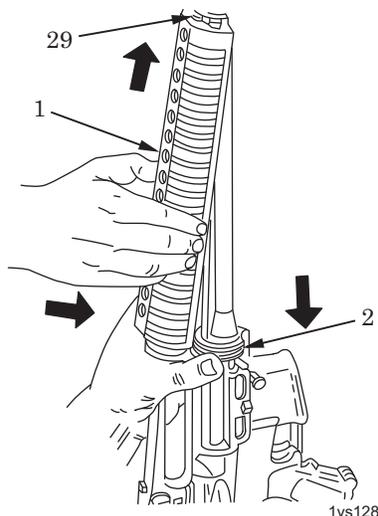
Installation of Upper Handguard Assembly (M16A2).
